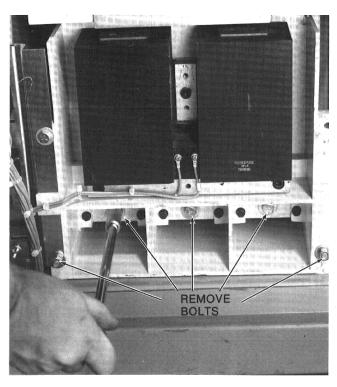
Remove the three load-side connecting bolts. (do not adjust the R.T.V. covered bolts)
